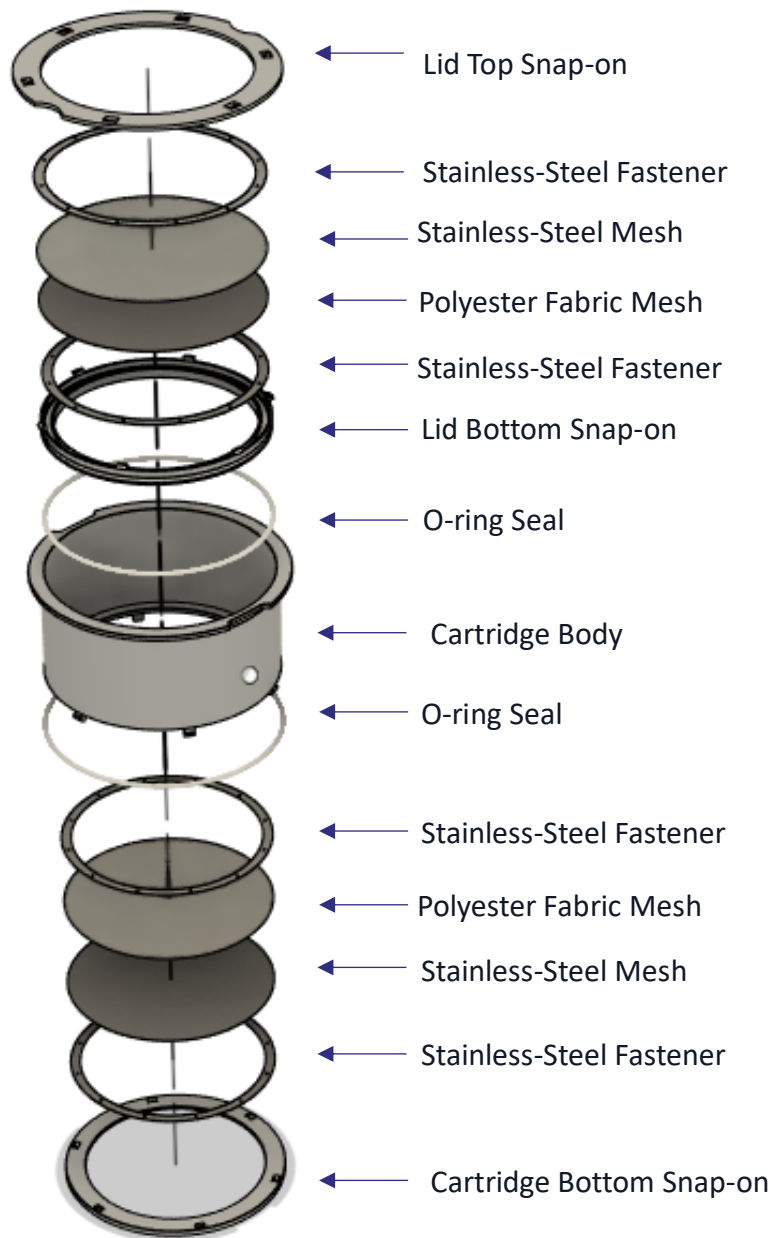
Exploded view of the filter cartridge assembly, labelled with each part.
